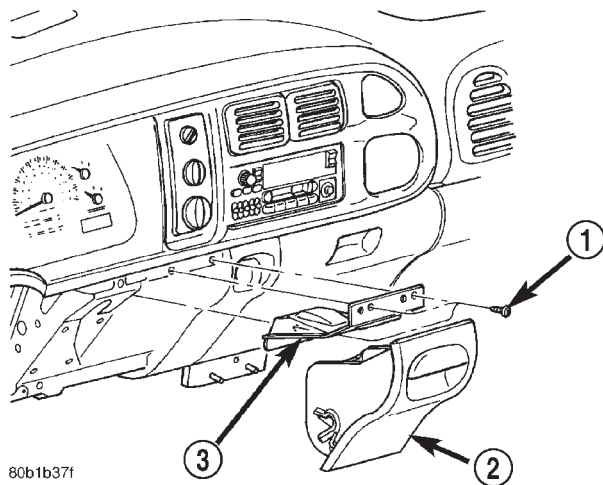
Instrument Panel Ash Receiver Remove/Install
